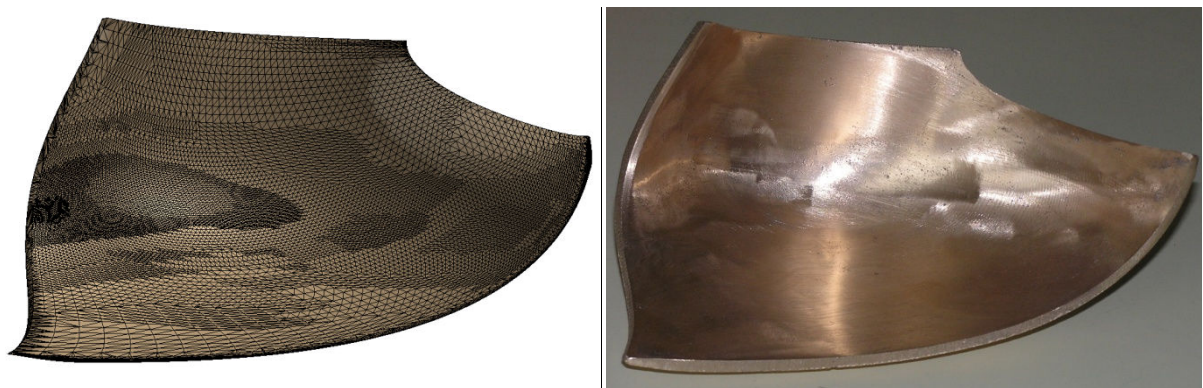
Left: 3D CAD drawing of the turbine blade. STL triangulation is also visible. Right: Turbine blade, after casting and machining.
